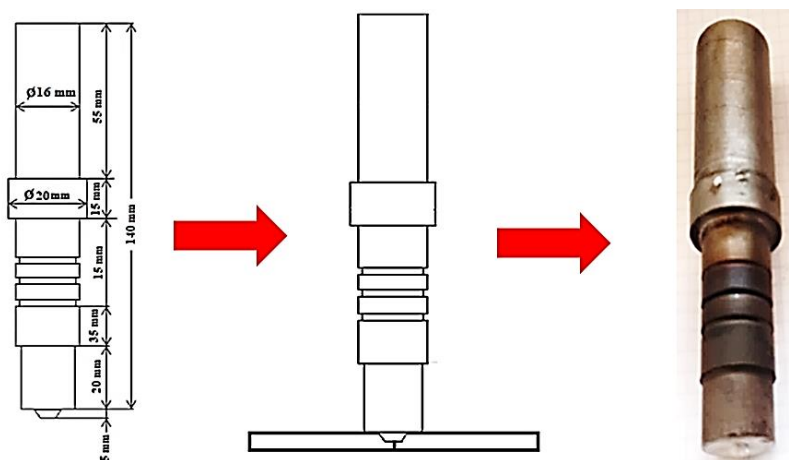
Friction stir welding (FSW) tool used in the FSW experiments
